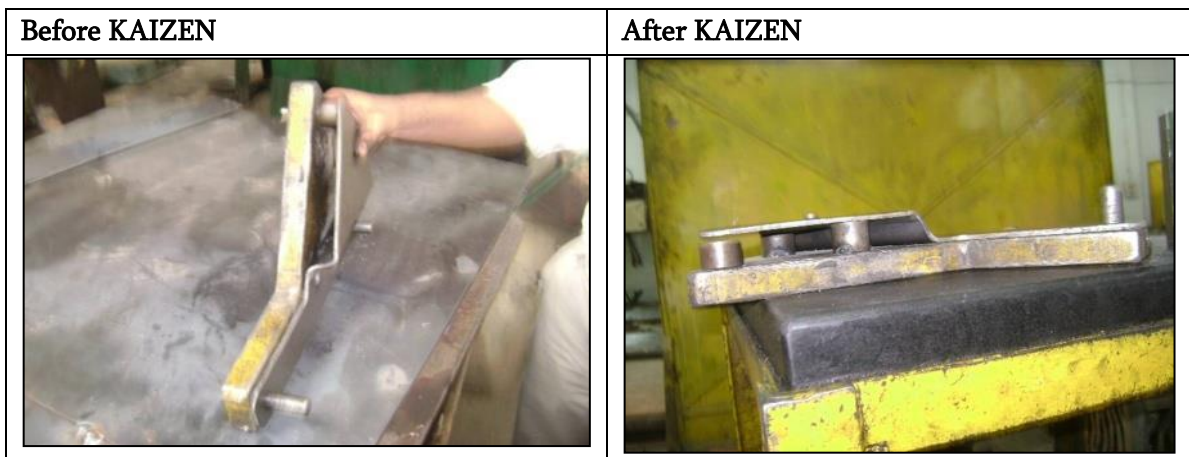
Improved in the Slot made & strip welded by using KAIZEN
